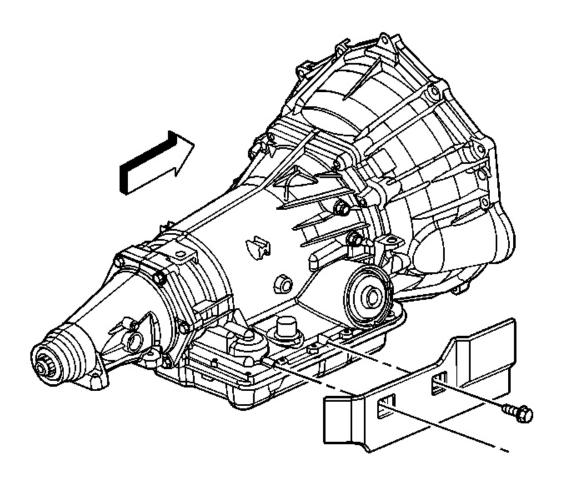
View Of Transmission Heat Shield Bolts & Shield Courtesy of GENERAL MOTORS CORP.
